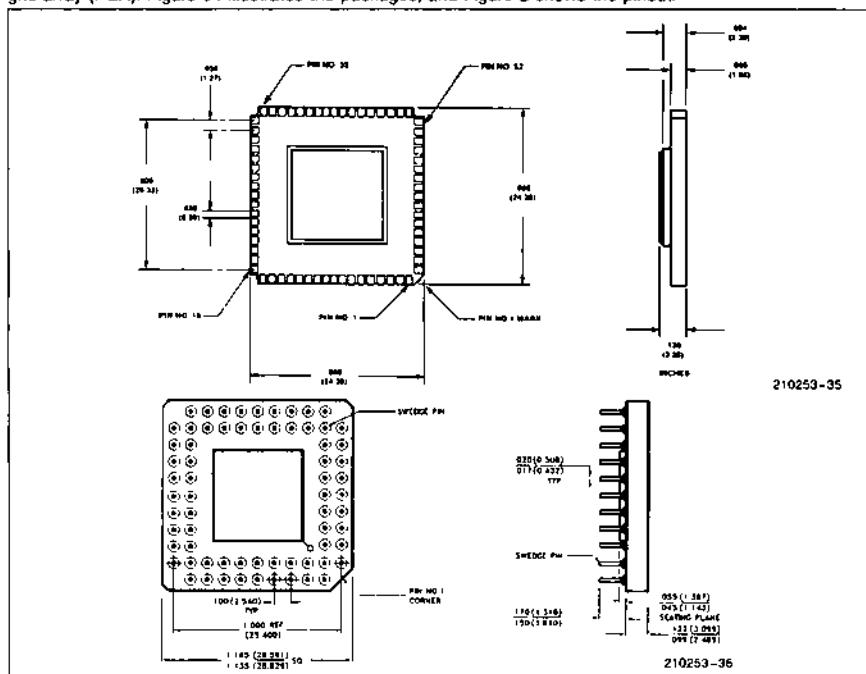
JEDEC Type A Package (Top) and Pin Grid Array Package
